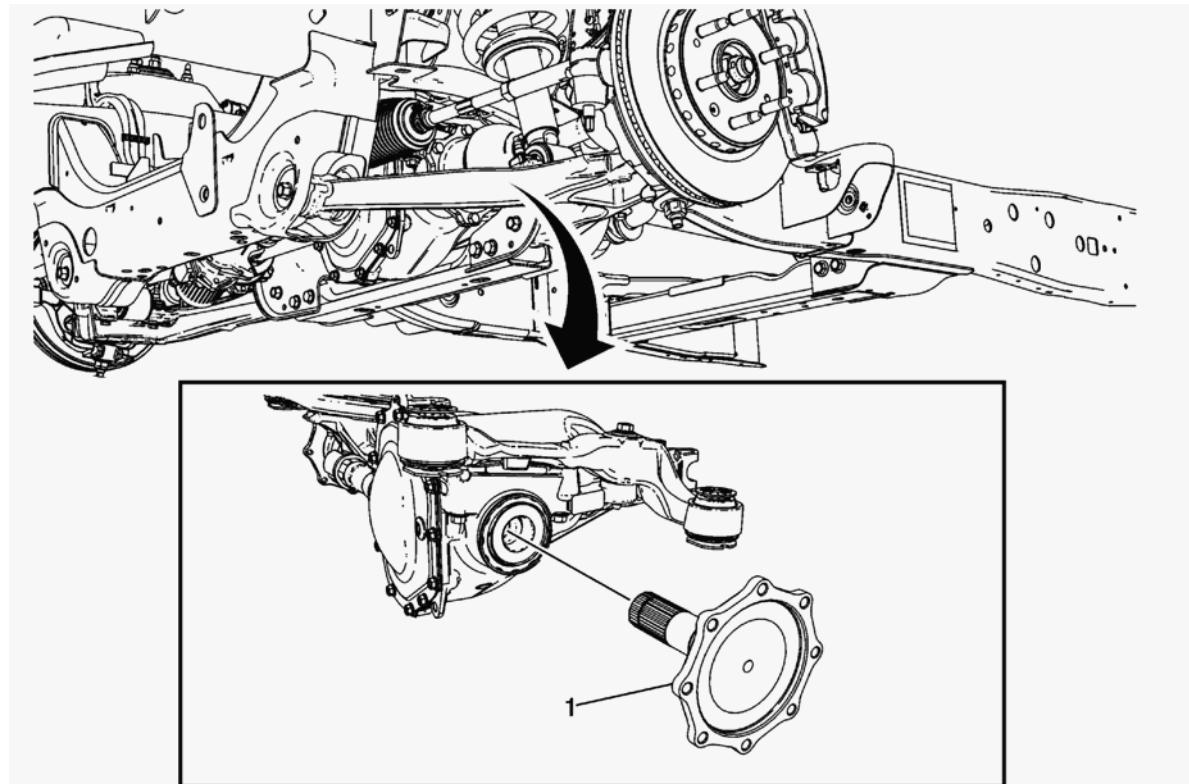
Front Drive Axle Inner Shaft (Left Side)
